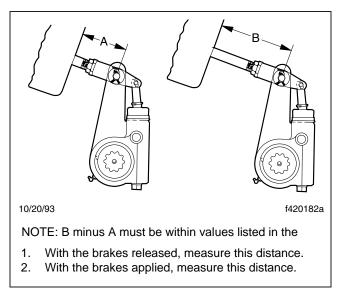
Brake Stroke Check, Meritor Automatic Slack Adjuster
